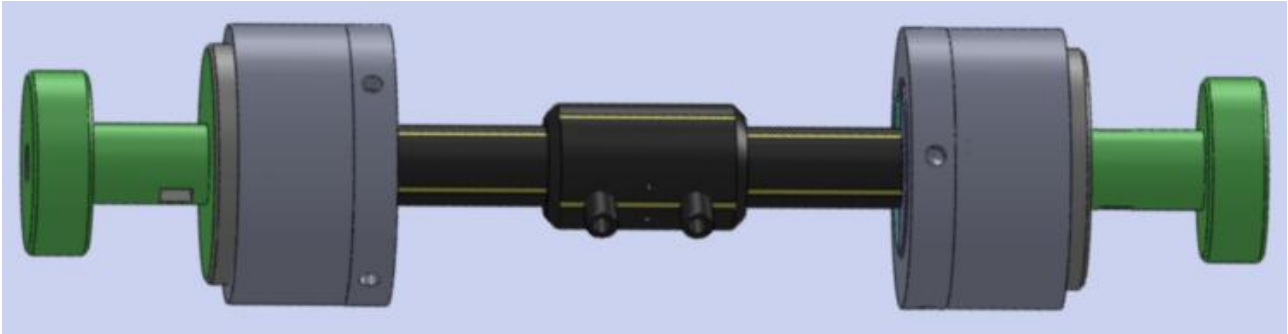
Grip of a pipe welded by electro-fusion, for testing.
